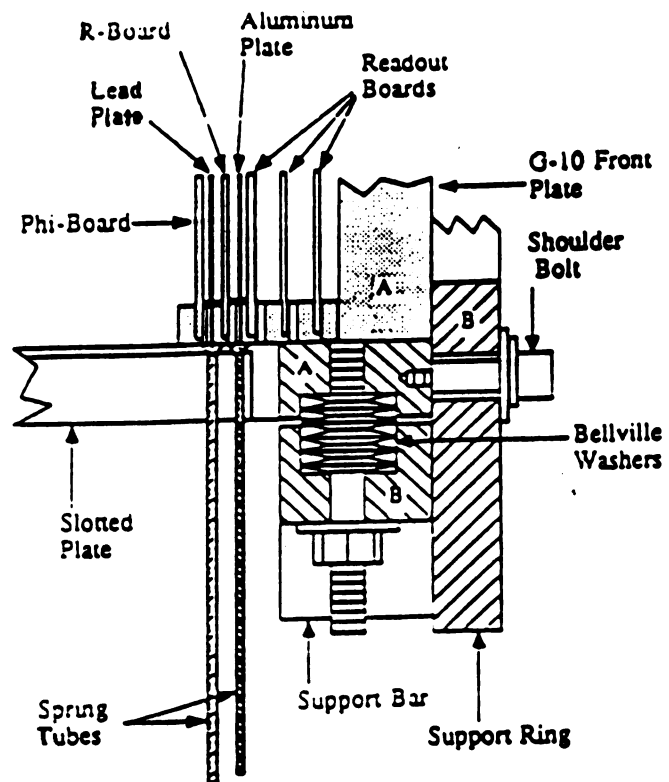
Cross-sectional drawing of a quadrant support assembly for the EMLAC
